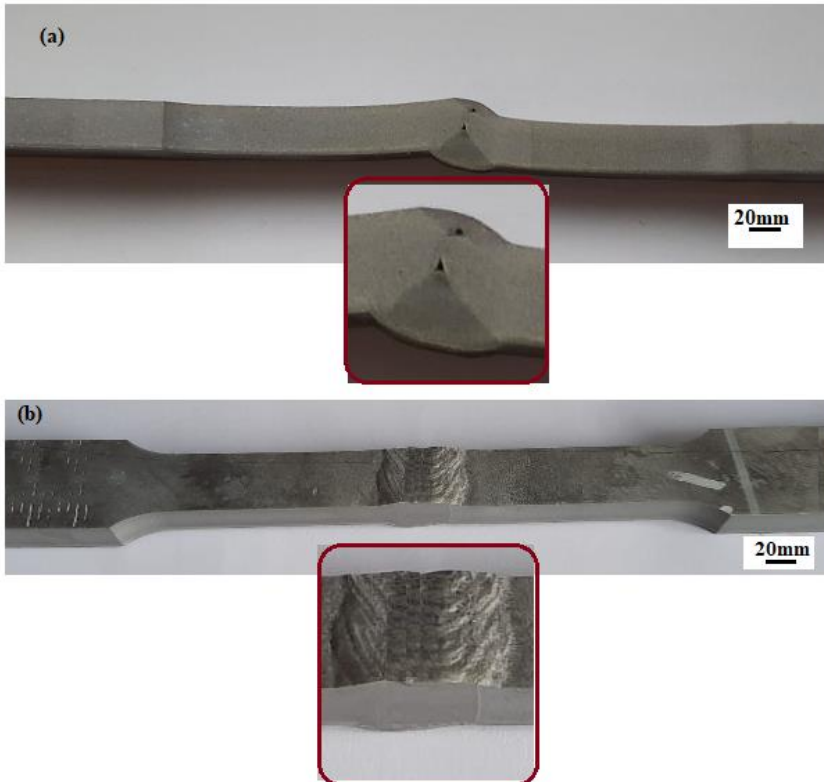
Macro images of welded samples (a) TIG welding (b) MIG welding
